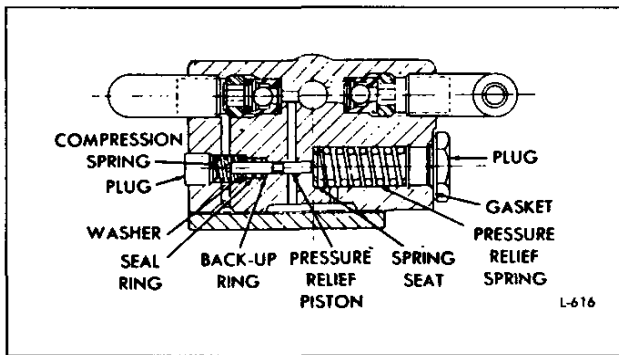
Engine-Driven Hydrostarter Charging Pump Pressure Relief Piston Assembly
